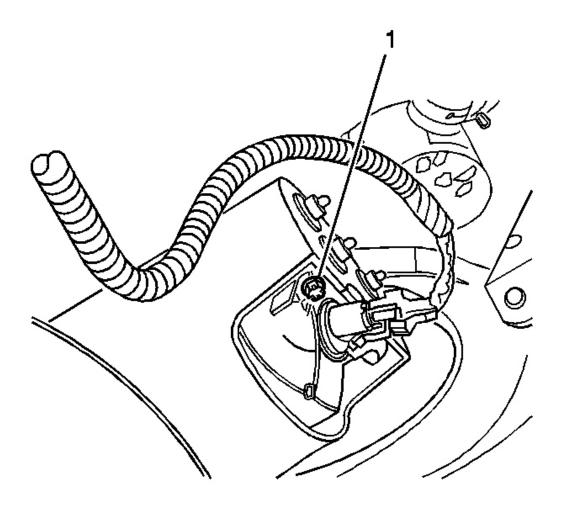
Front Foglamp Adjustment Screw Courtesy of GENERAL MOTORS CORP.
